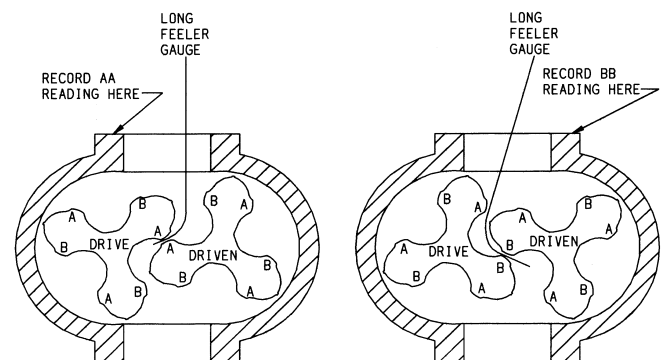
B. Checking Interlobe Clearance on 3-lobe Models
